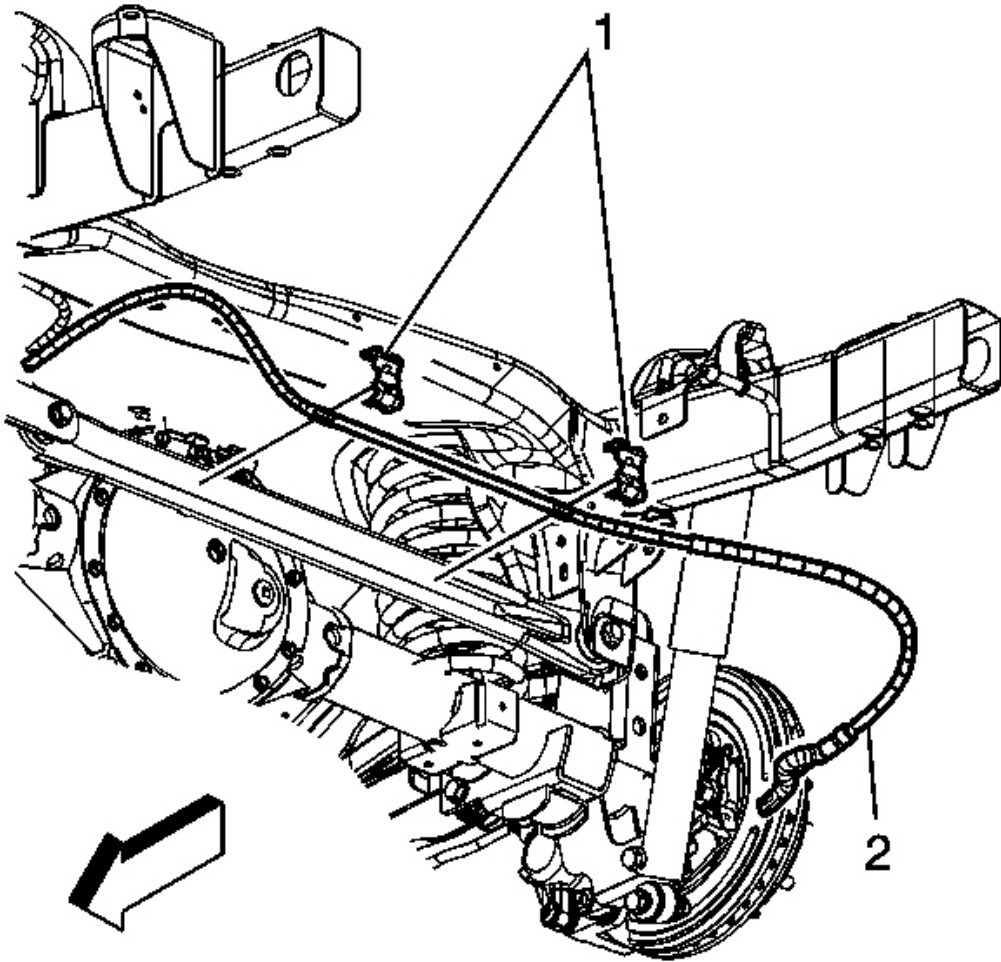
Right-Rear Park Brake Cable, Backing Plate, Park Brake Actuator & Cable Guide
